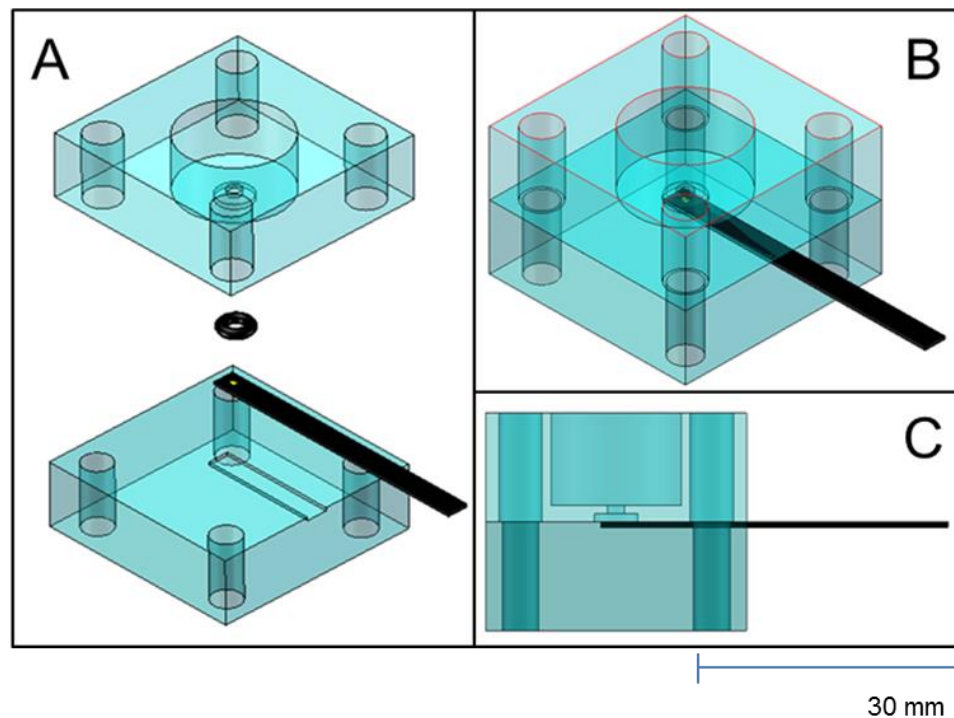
A) The expanded view of the cell culture probe holder including an O-ring which forms a water-tight seal. B) The design drawing of the constructed cell culture holder and probe. C) The side-profile view of the cell culture probe holder.
